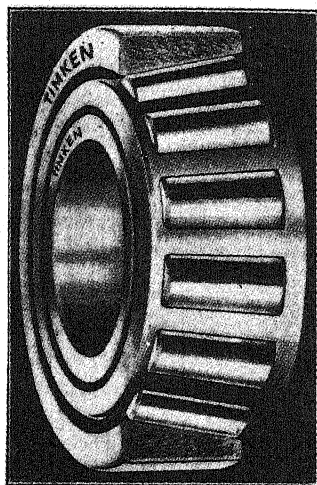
Cutaway view of completed assembly of tapered roller bearing.
